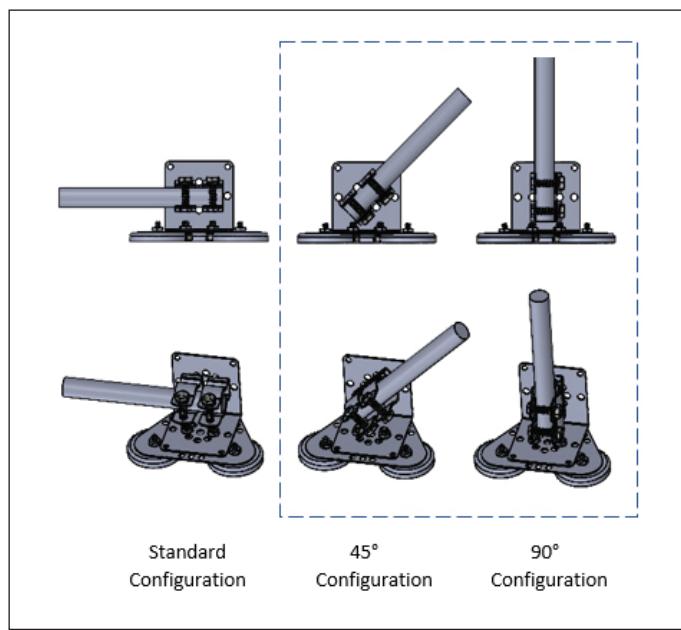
EMT Tri-Foot Magnet Conduit Bracket Assembly for 38 thru 58" UV Lamp Lengths
